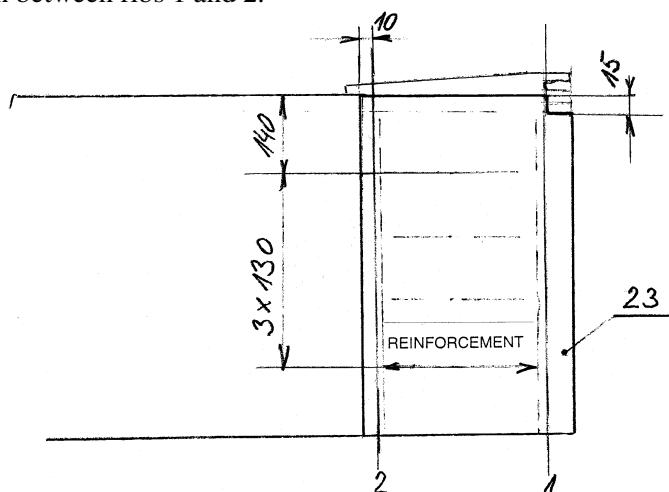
(Pl. 1,2 680x320 mm) align at skin, clamp, drill together with skin, cleco. Align struts between marked ribs flange, drill together with doubled skin. Trim skin overlay pos. 23 around hinge as shown at sketch.
